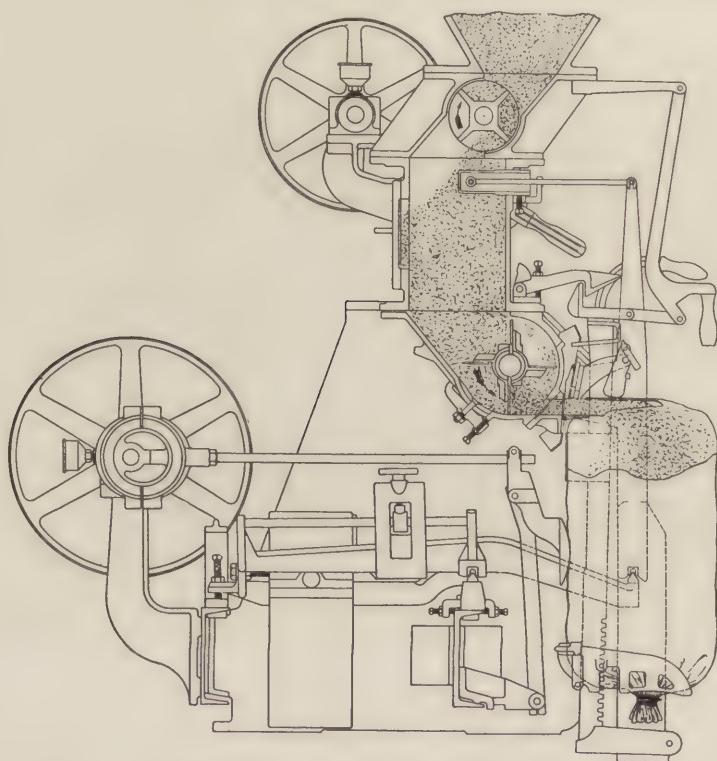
Cross section of the Bates packer, showing the course of material feeding through the machine into a valve bag.
